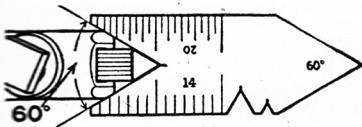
Cutter bit for cutting screw threads is ground to 60° center gage.
